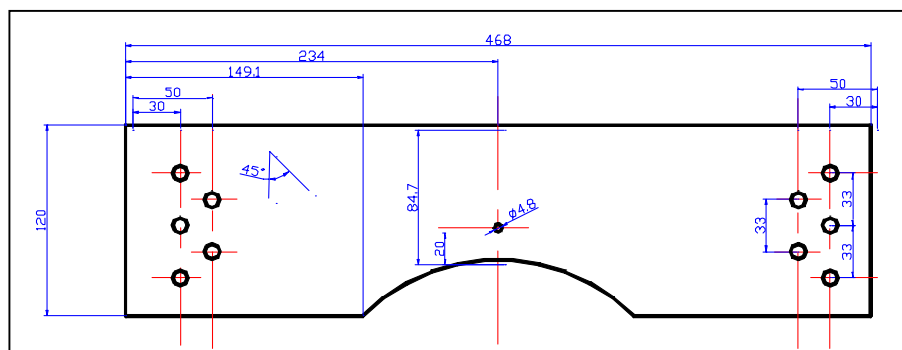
Airbus standard door corner cut out specimen with bore hole
